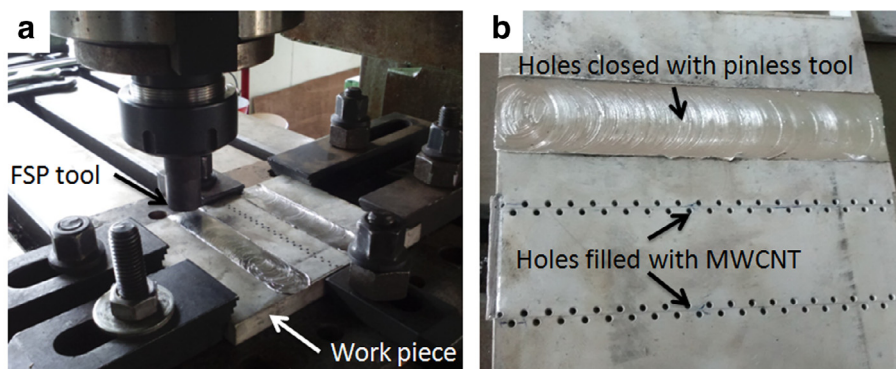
(a) Photographs showing FSP process and (b) workpiece with CNT filled holes.
